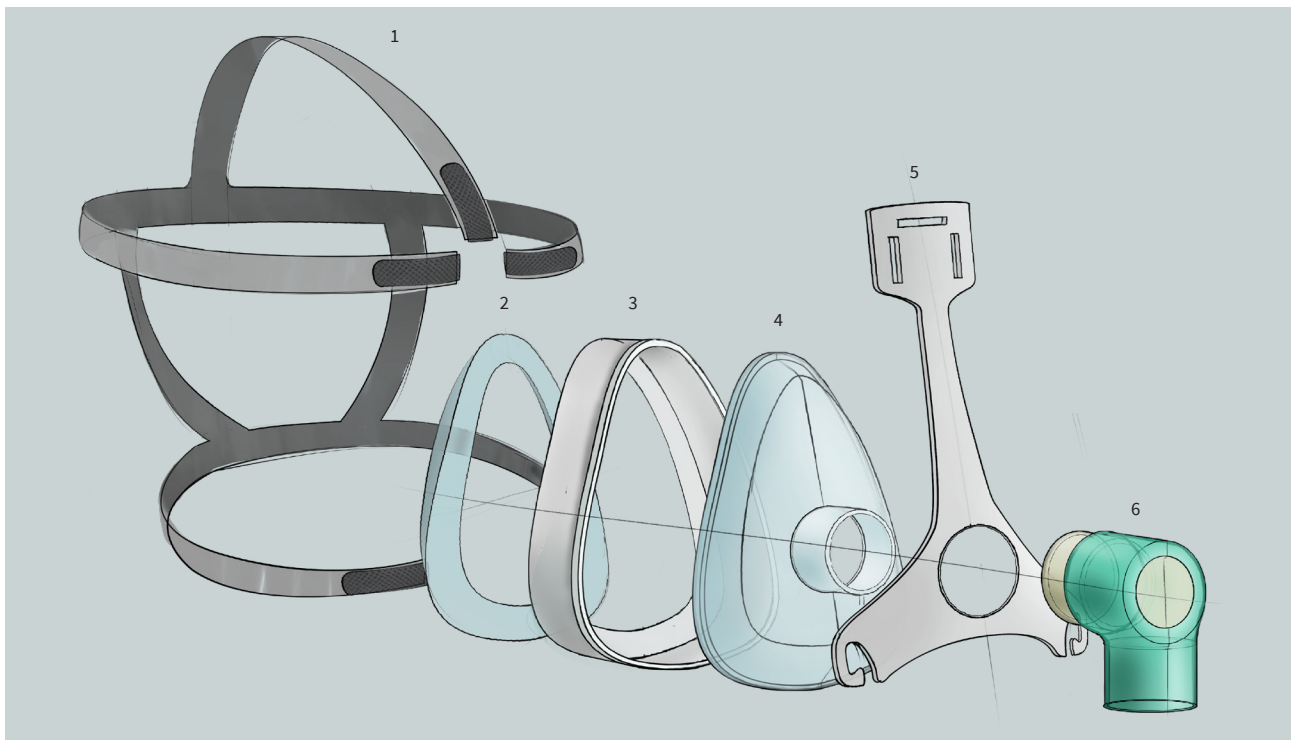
Parts of the Deformable Mask, (1) headgear, (2) cushion, (3) cushion holder, (4) frame, (5) holder, and (6) swivel.
